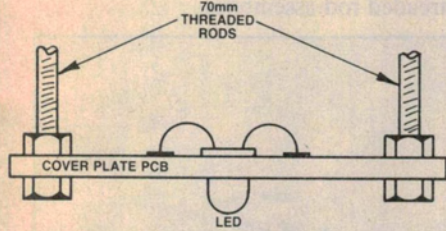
diagram showing how the two threaded rods are fastened to the cover plate PCB.
